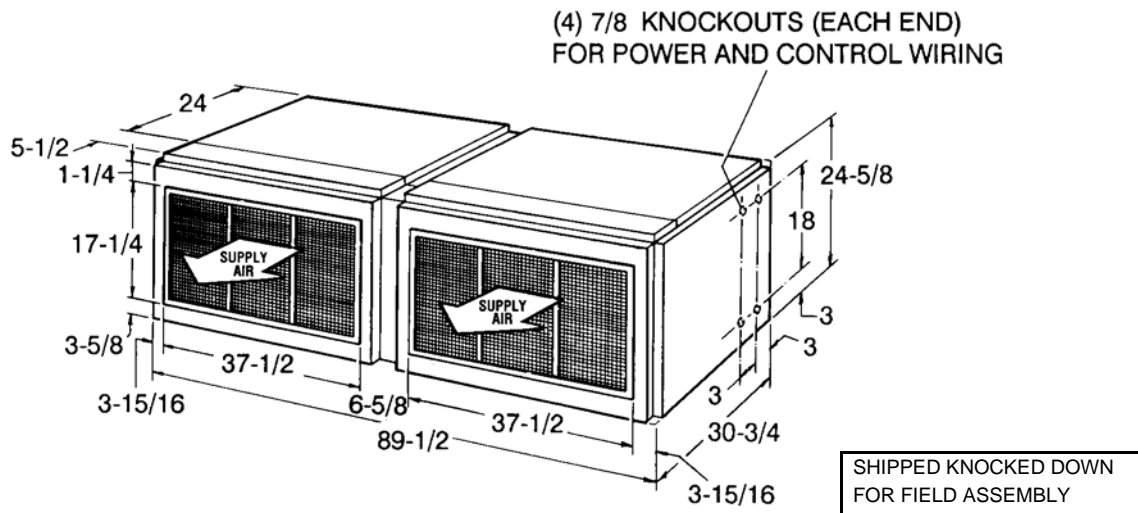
SUPPLY AIR PLENUM - MODEL 1SP0405
